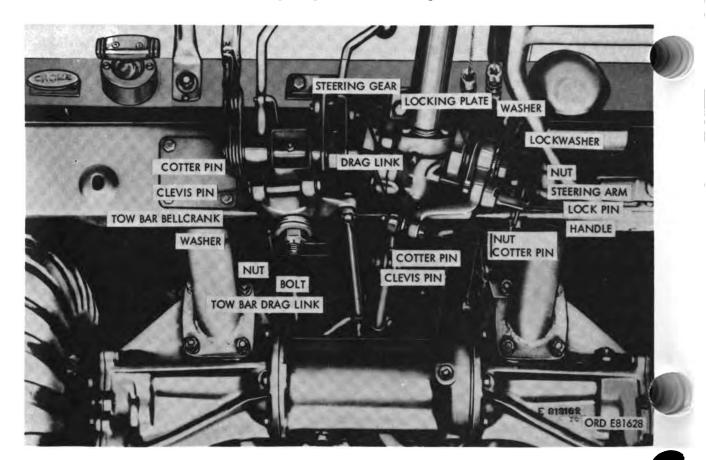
Steering gear and arm showing lockpin pulled out to disconnected steering arm from locking plate.
